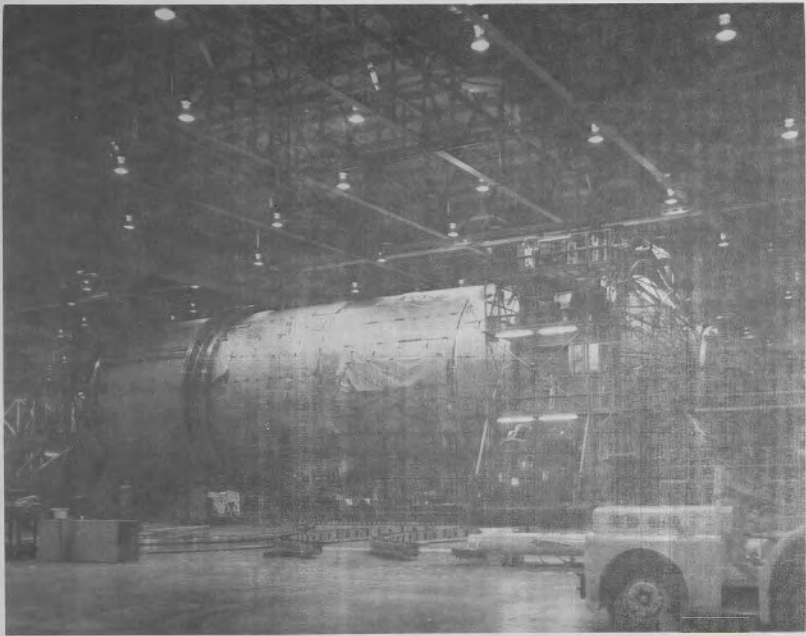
External Tank Liquid Hydrogen Tank Weld Fixture
